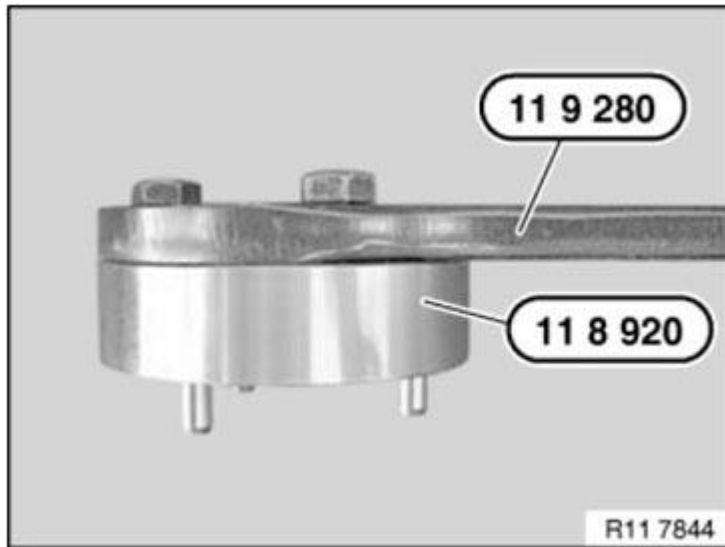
Fitting Special Tool 11 8 920 On Special Tool 11 9 280
